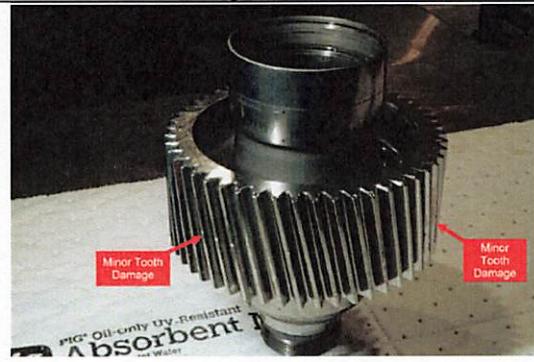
Photo of LH PRGB -105 Upper Input Idler Helical Gear Damage (Tab J-48)
